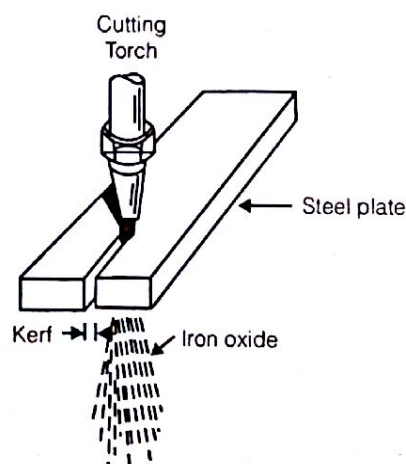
Flame cutting of steel plate with oxyacetylene torch
